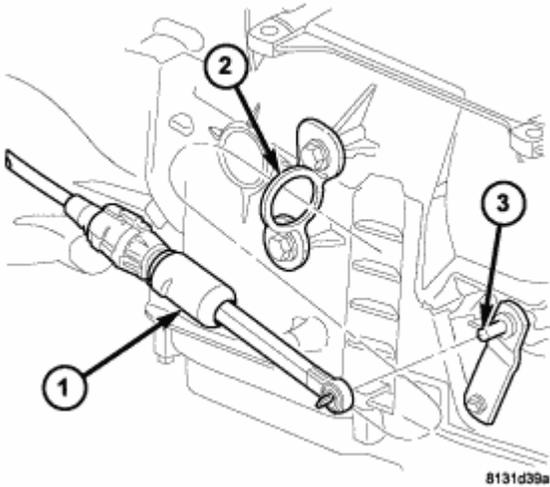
Gearshift Cable, Gearshift Cable Bracket & Manual Shift Lever
